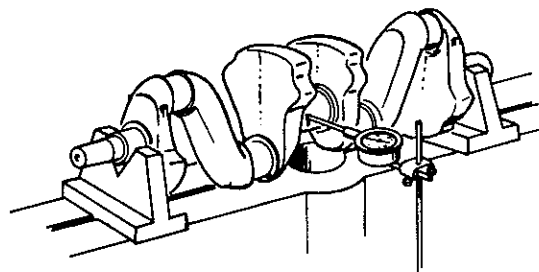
CHECKING CRANKSHAFT RUNOUT
